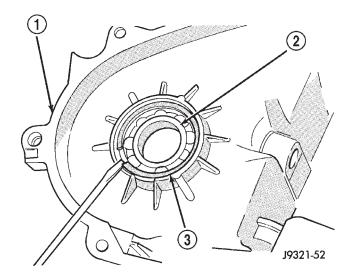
Output Shaft Front Bearing Snap-Ring Removal
